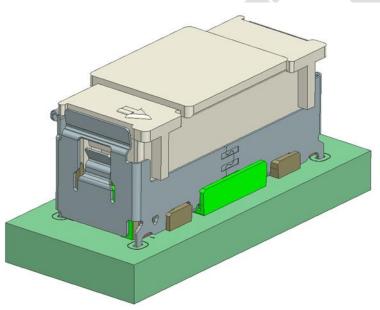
Fixed-Side Connector with Vacuum Cap
